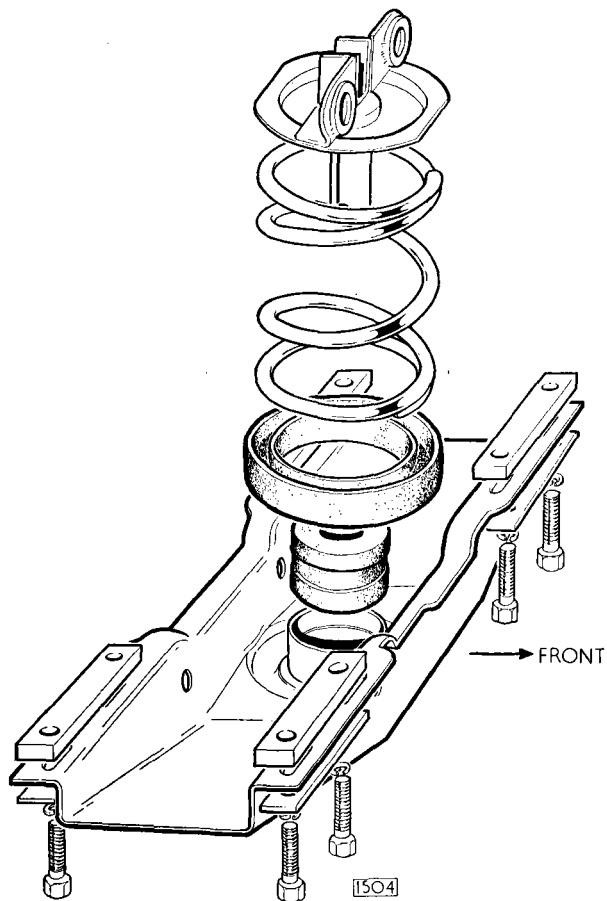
Exploded view of the rear mounting assembly (standard transmission and overdrive models).
